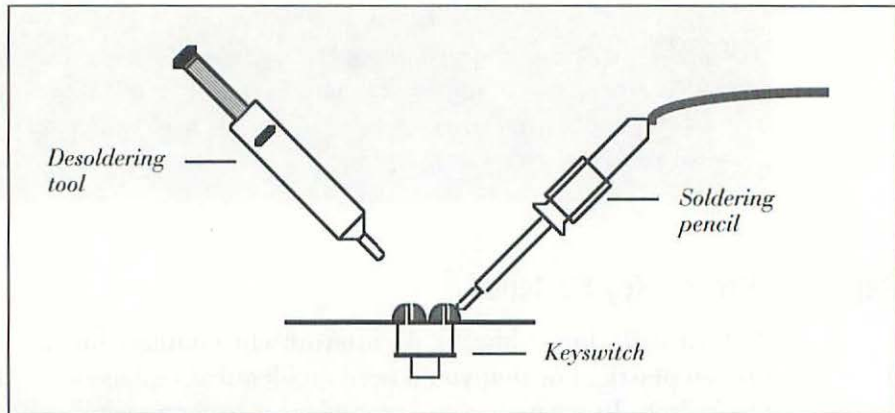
Desolder the defective switch with a low-wattage, grounded soldering pencil and a vacuum desoldering tool.
